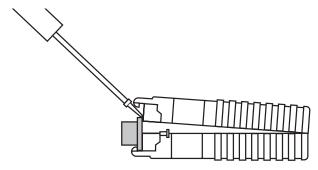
How to Use a Small Flathead Screwdriver to Finish Opening the Model 2070 Case
